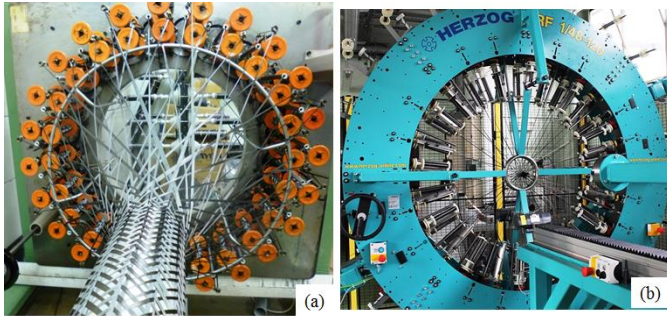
48-carrier braiding machines in the University of Manchester (a) maypole (Cobra Braiding Machinery Ltd) (b) radial braiding machine (August Herzog Maschinenfabrik GmbH & Co. KG)
